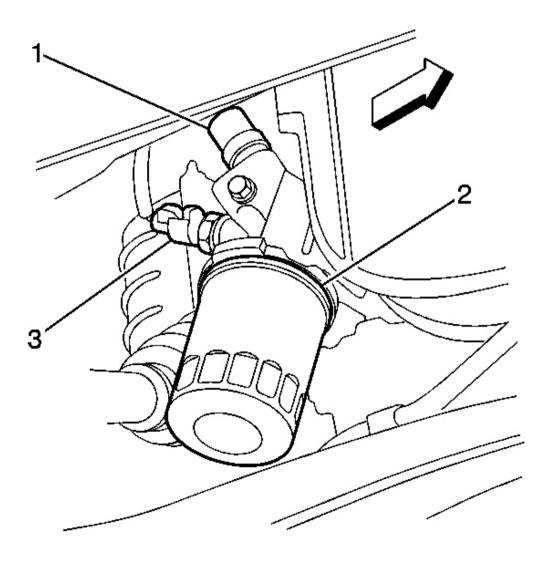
View Of Rocker Arm Oil Control System Courtesy of GENERAL MOTORS CORP.
